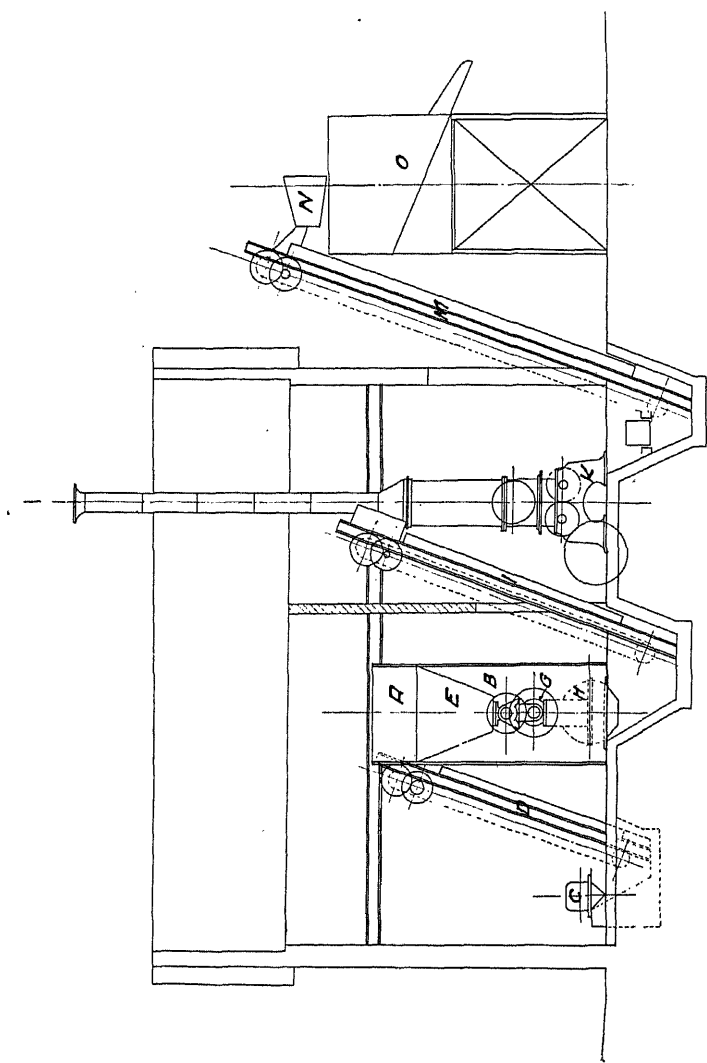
SECTIONAL ELEVATION OF PLANT FOR PRODUCING OVOIDS
